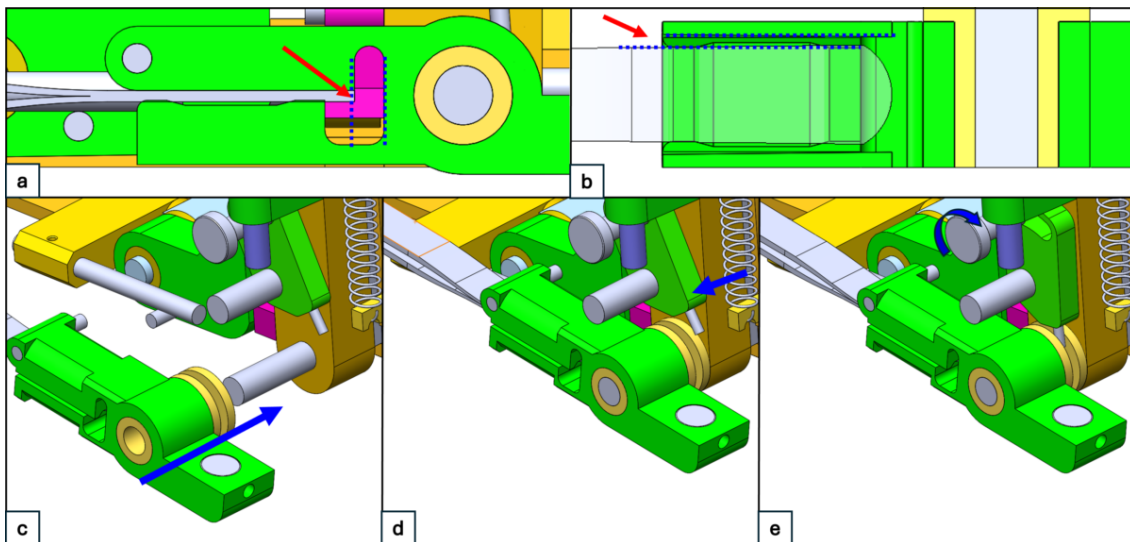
a. Sectioned side view of the pendulum base (14), showing the clearance in the clamp to adjust the tweezers (6) in and out for positioning. b. Sectioned top view of the pendulum base, showing the side-to-side clearance in the clamp to rotate the tweezers for positioning. c. Installing the tweezers onto the plunger (10) by sliding the pendulum base over the rotation pin (21). d. Locking the axial movement of the pendulum base by pushing the pendulum lock lever (22) into the groove. e. Tightening the pendulum lock knob to secure the pendulum lock lever.
